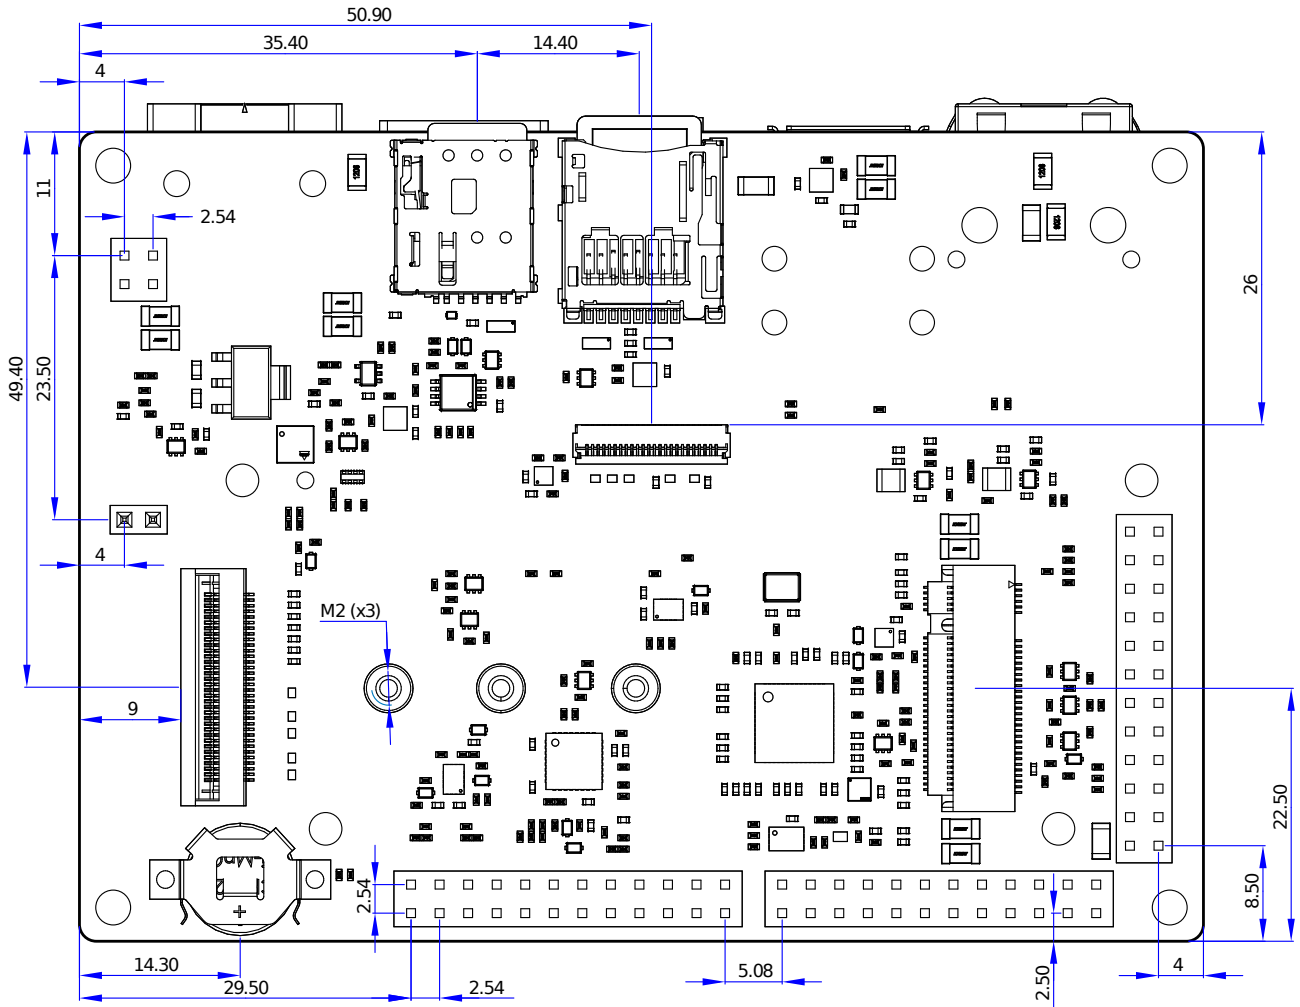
Mallow Carrier Board dimensions (in millimeters) - front side (front view)
